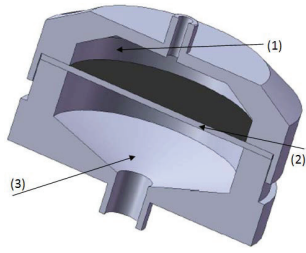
Seccional view of the oil pump. (1) compressed air chamber, (2) diaphragm, (3) oil chamber.
